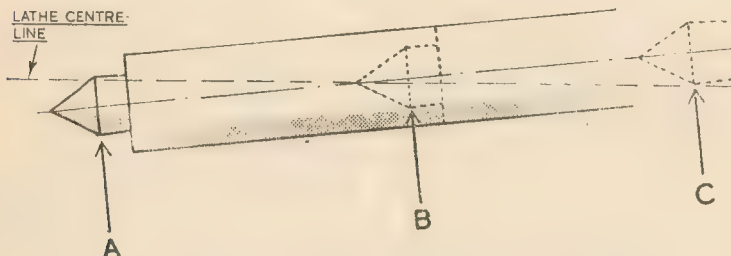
Showing the effect of the tailstock being out of axial alignment
